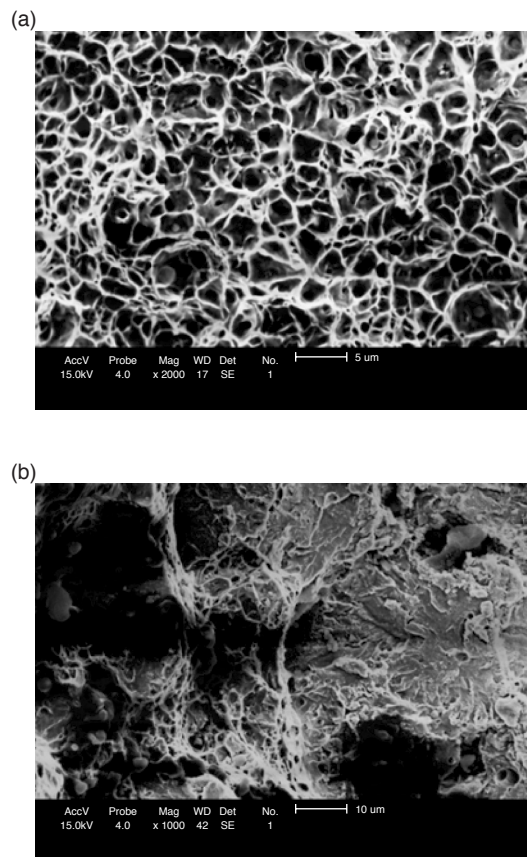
Frature surface of welded joints (a) T1.0 welded joint in air (2000X); (b) E1.0 welded joint in solution (1000X).
